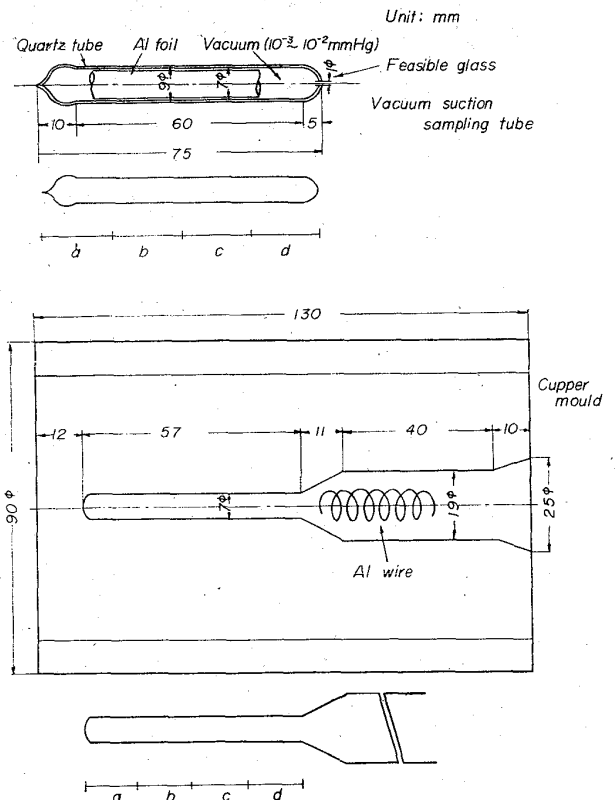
Vacuum suction sampling tube and copper sampling mould.
